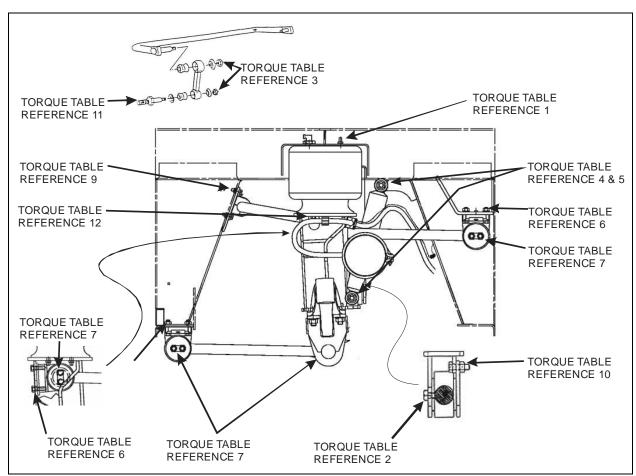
TORQUE SPECIFICATIONS – FRONT I-BEAM AXLE
